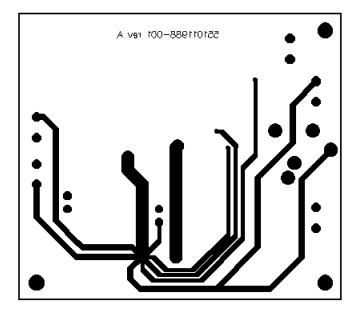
Recommended MM PC Board Layout: Bottom-Side Layout
